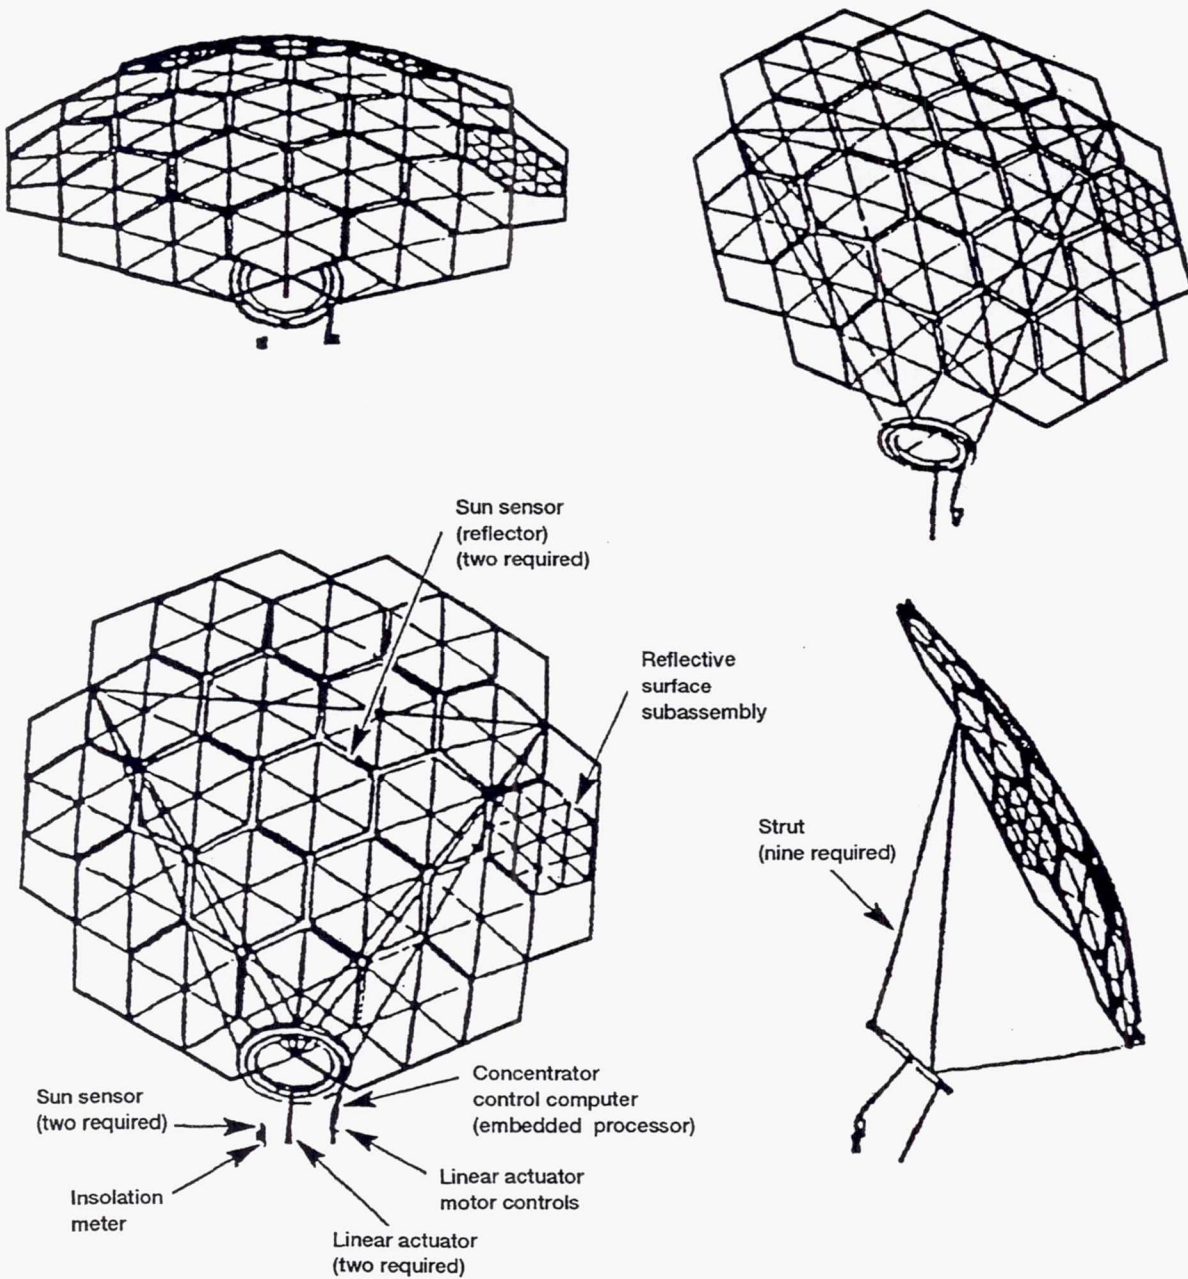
Solar dynamic power module concentrator assembly. (Interface structure and wiring harness not shown.)
